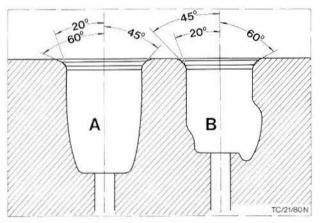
Valve seat angle. A – Inlet valve seat. B – Exhaust valve seat.
